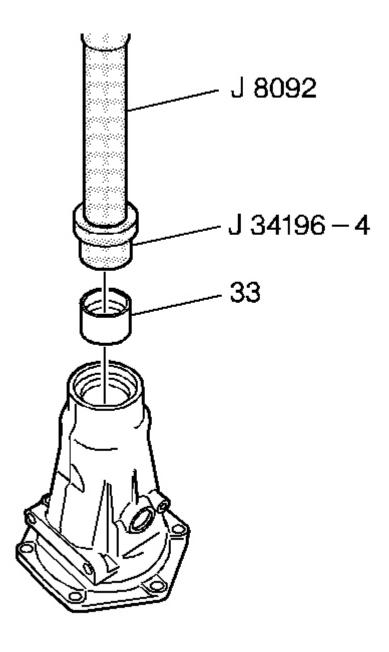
Identifying Case Extension Bushing, Special Tools J 23062-14 & J 8092
